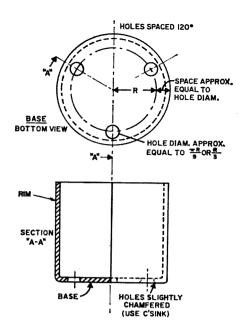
Arrangement of vent holes in the copper pipe cap heat sinks.
